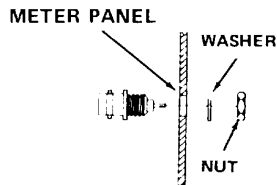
Monitor Front Panel and Chassis-Mounted Parts Location Diagram (Sheet 2 of 4)
